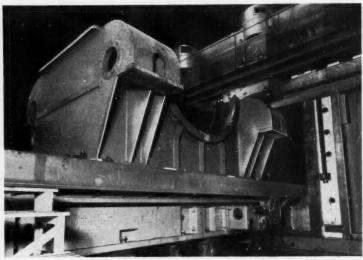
Right-hand Side View of the Large Kendall & Gent Planomilling Machine
